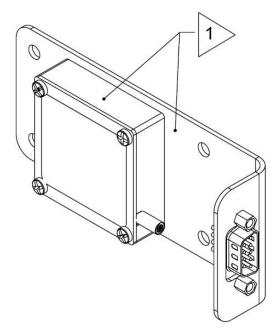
SCM Oblique View (Note 1: Resistance between mounting plate and module not to exceed 20 milli-ohms. Also, resistance between mounting plate and aircraft structure not to exceed 20 milli-ohms.)
